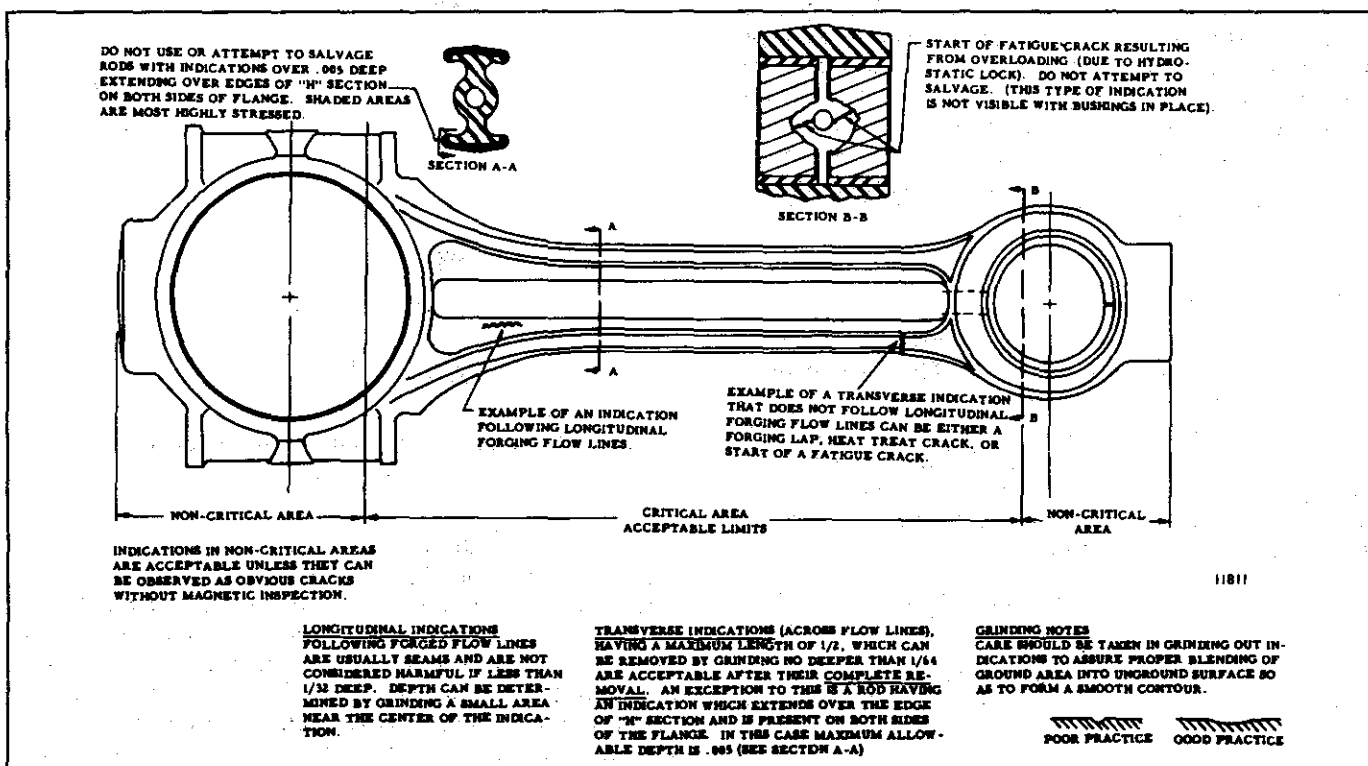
Magnetic Particle Inspection Limits for Connecting Rod
